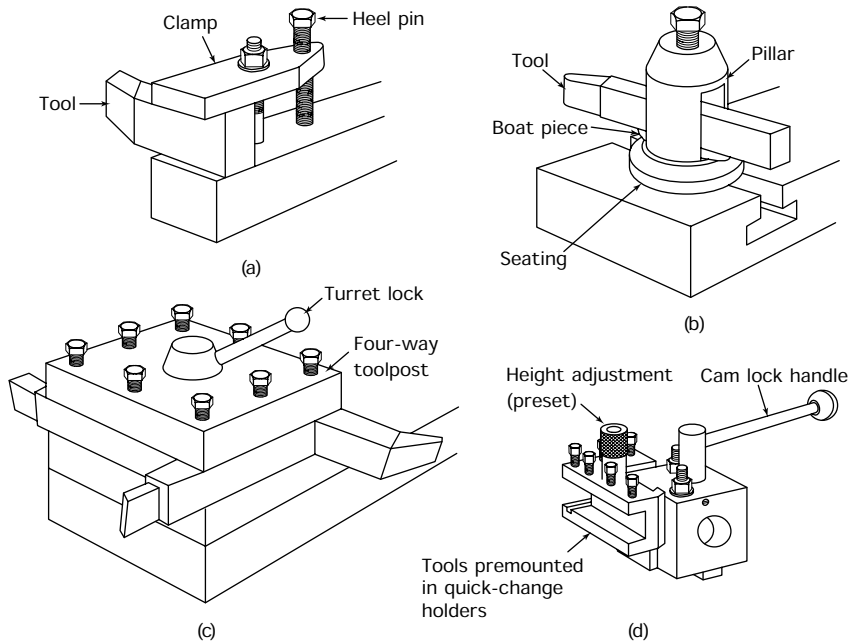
Centre lathe toolposts: (a) English (clamp) type toolpost; (b) American (pillar) type toolpost; (c) turret (fourway) type toolpost; (d) quick release type toolpost
